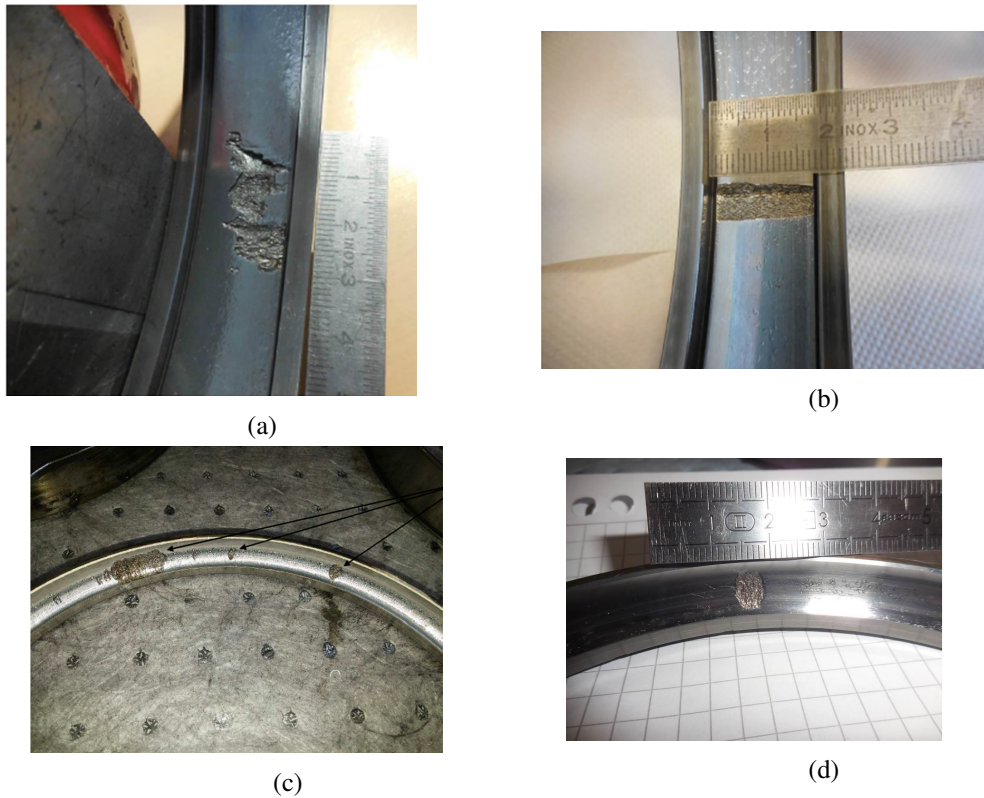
Damaged bearings after inspection. Outer race presenting spalled area at the time of removal – a) Bearing fault case 1 ; b) Bearing fault case 2; c) Bearing fault case 3 ; d) Bearing fault case 4.
